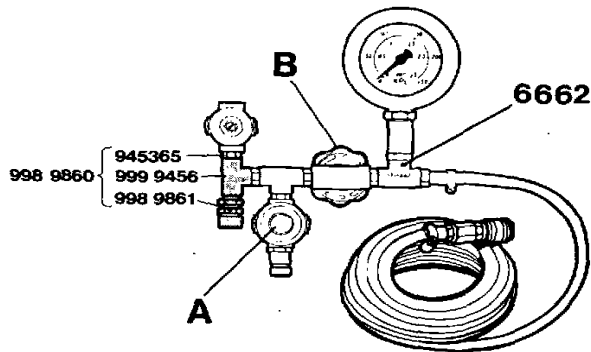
Fitting of kit 998 9860 on the pressure testing device 6662 (Sweden only)
